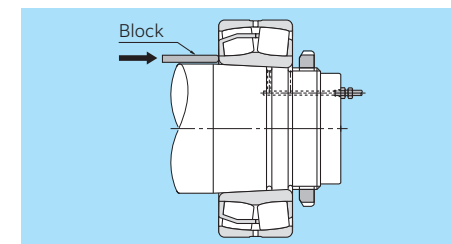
Disassembly of bearing with withdrawal sleeve
